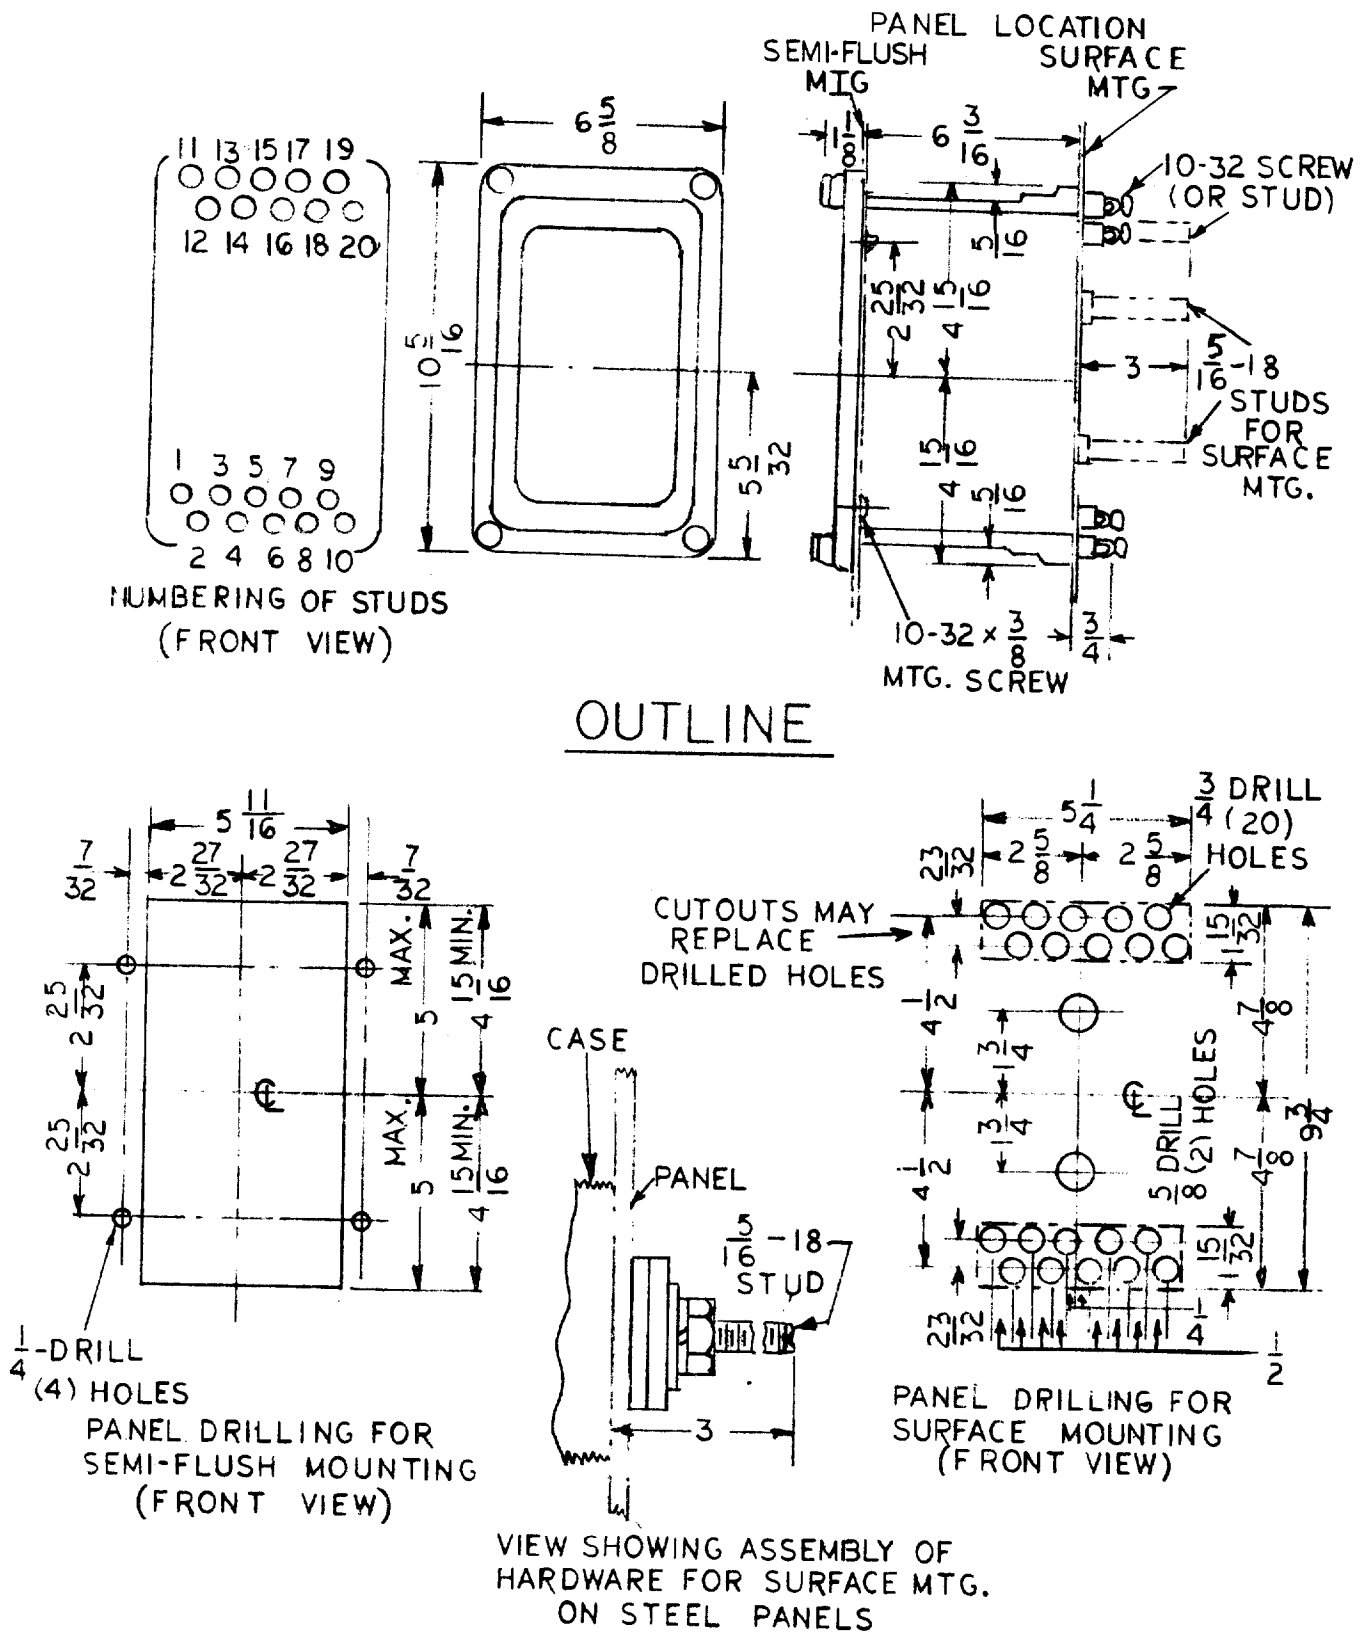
(K-6209272) OUTLINE AND PANEL DRILLING DIMENSIONS FOR THE NGV28B(-)A RELAY-SIZE S2 CASE.
